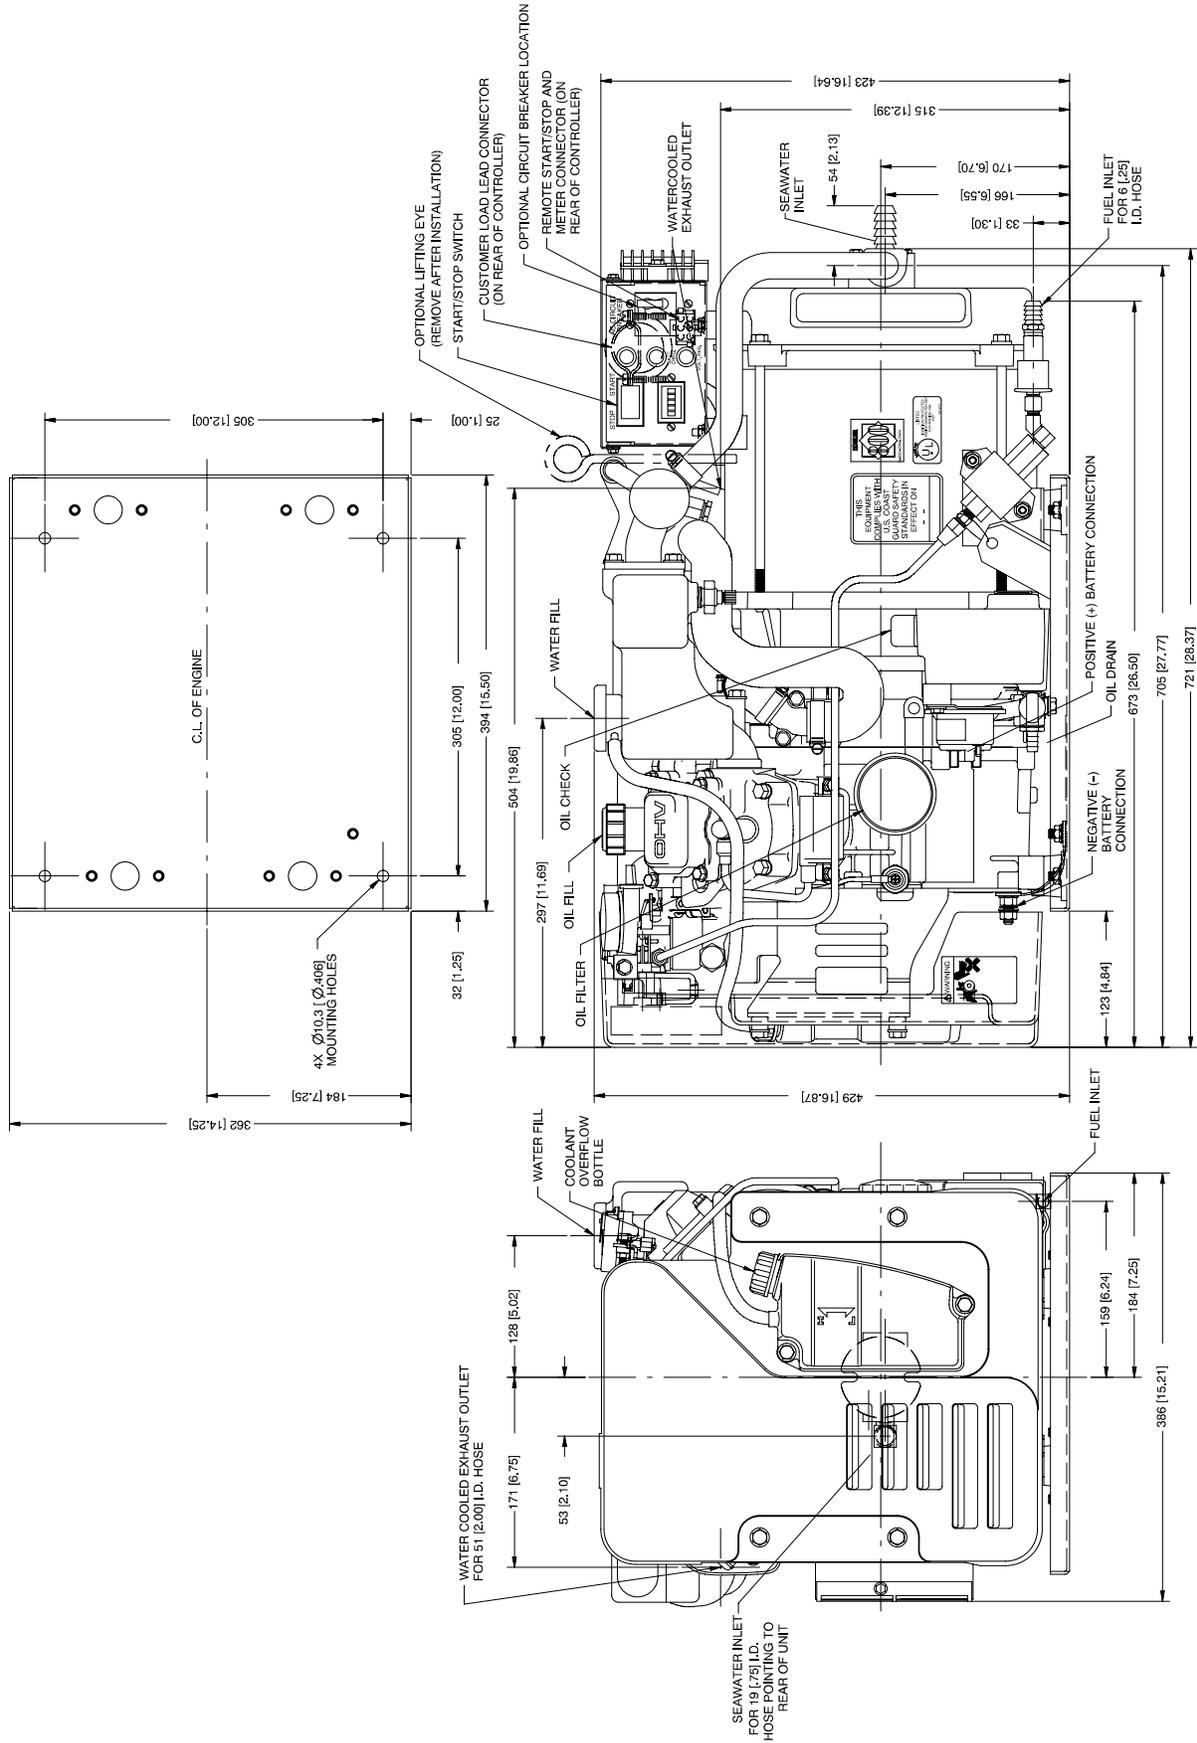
Dimension Drawing ADV-7025B-A, Sound Shield 5/7.3ECD and 4/6EFCD Models
